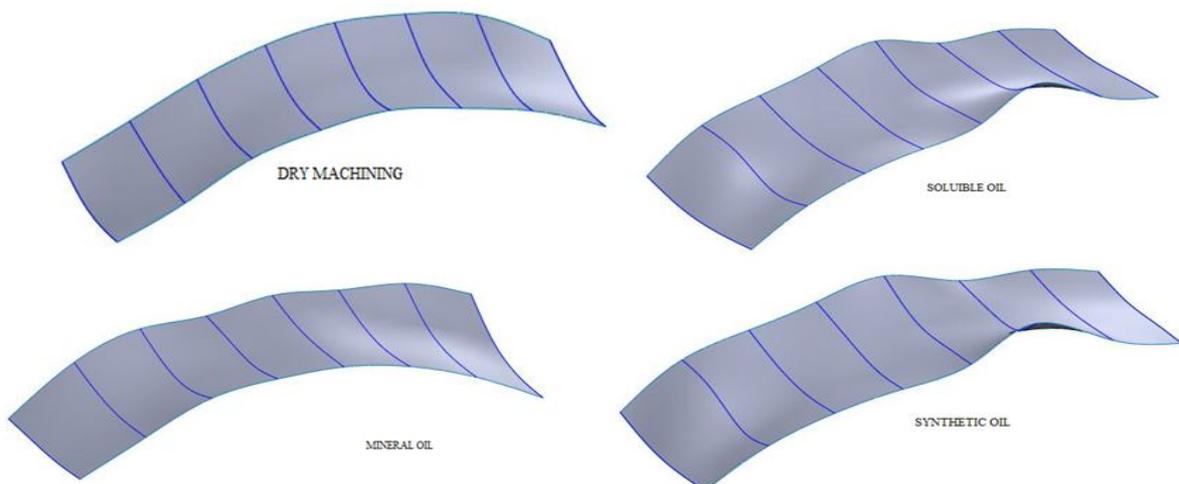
PROFILES OF THE WORK PICES AFTER MACHINING WITH DIFFERENT CUTTING FLUIDS
